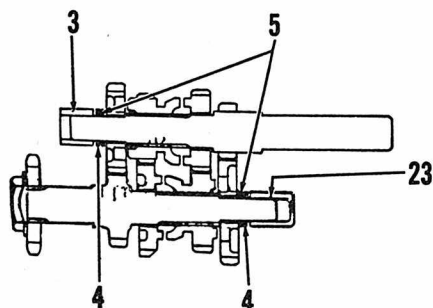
On four speed transmissions, fourth pinion and first gear shims (5) should be installed next to gears with thrust washers (4) against bushings.
